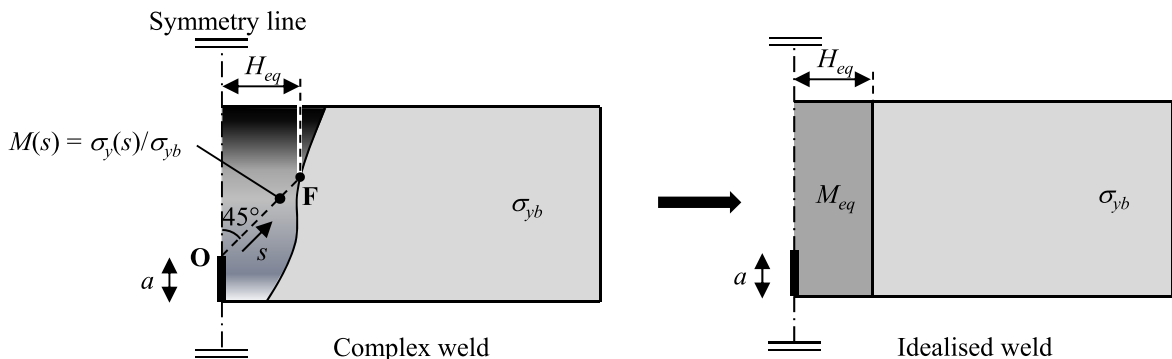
The original approach to derive an idealized weld from a complex weld. Taken from reference [9].
